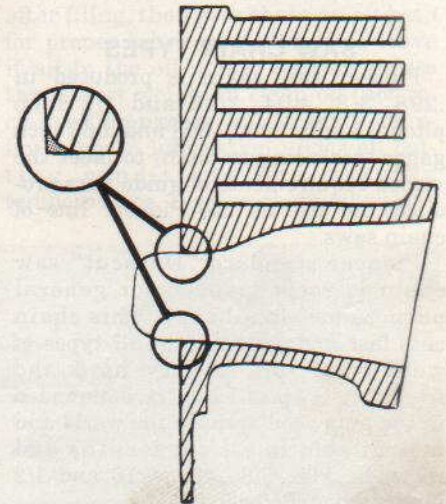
Some manufacturers recommend that edges of ports be chamfered as shown in insert, after reboring.
